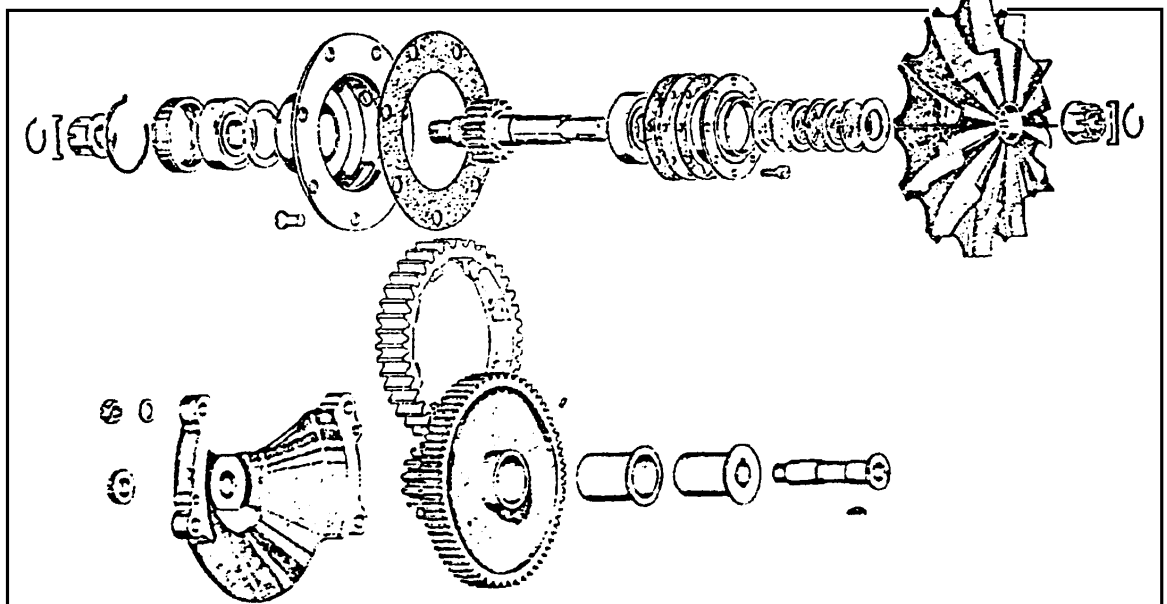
Supercharger Impeller and Impeller Gear Assembly
